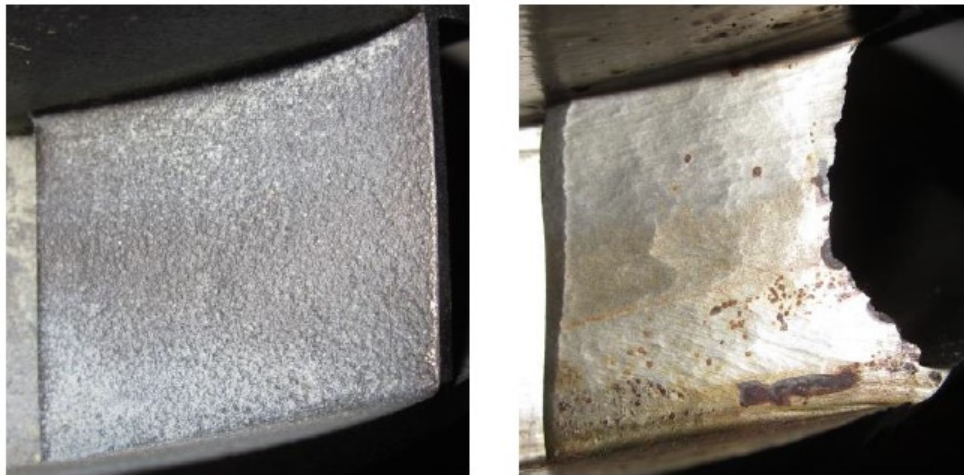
Eroded 2nd impeller exiting blades before and after 66 hours of test (Steck, 2014).
